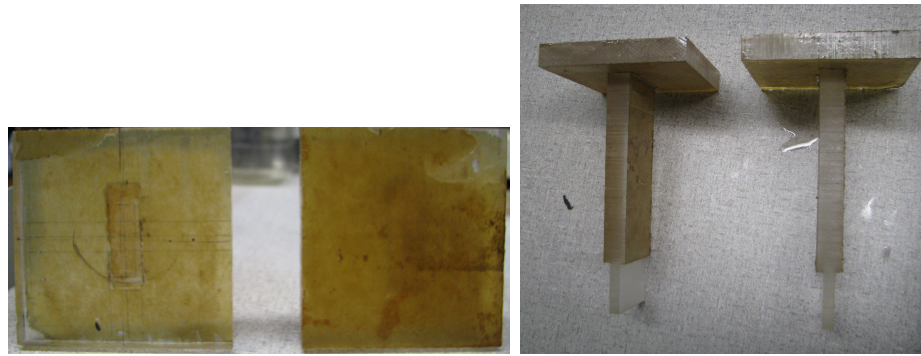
Uniaxial Compression Fixture a. Front View b. Top View
